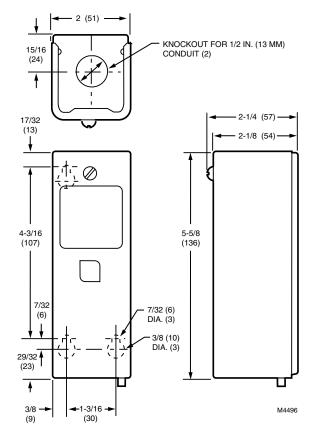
Dimensions of T4031, T6031 in in. (mm).
